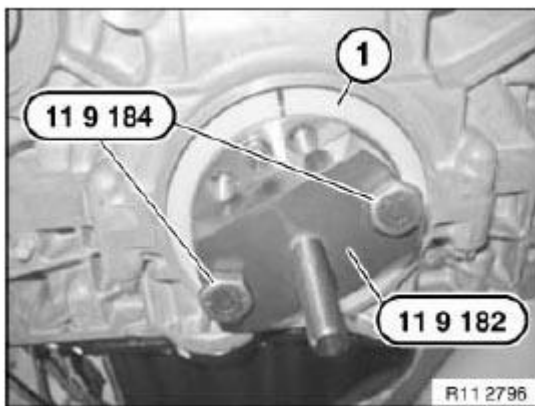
Identifying Spacer Ring With Special Tool (11 9 182) And (11 9 184)
